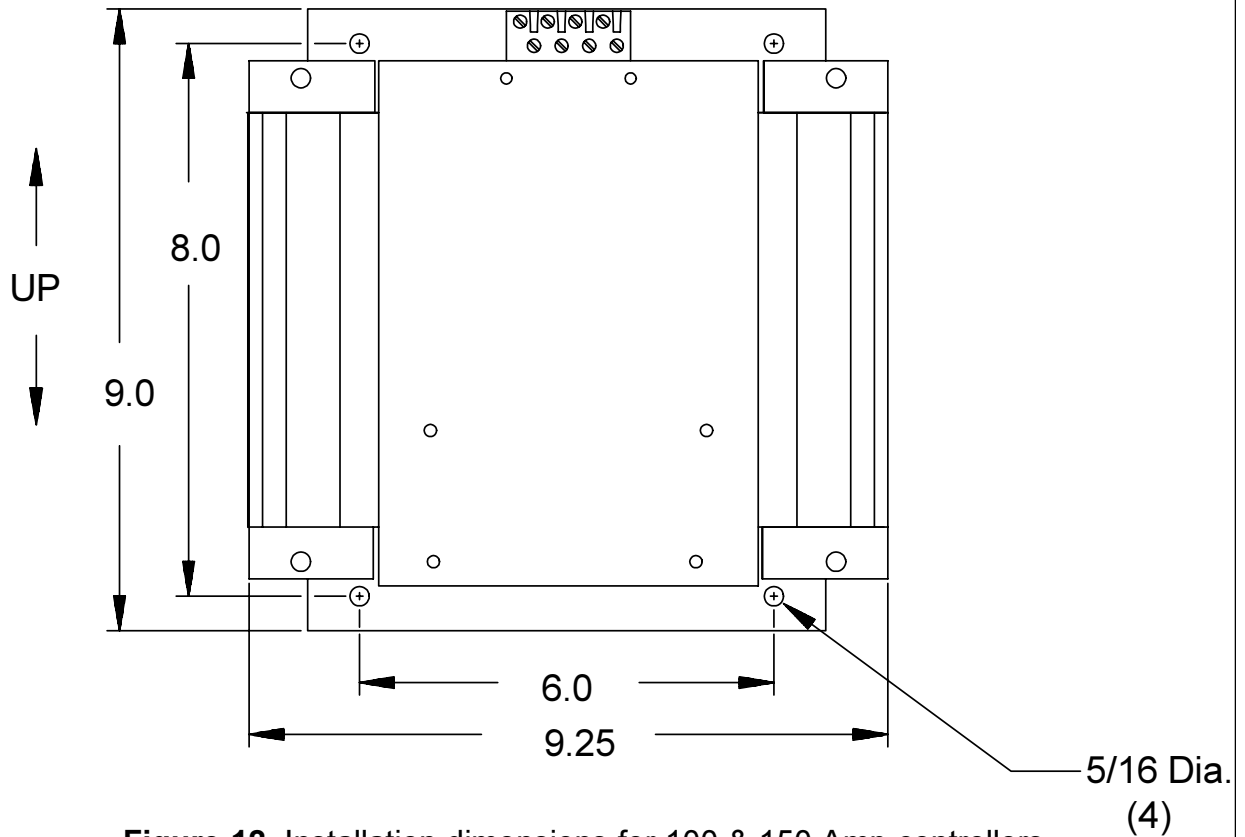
Installation dimensions for 100 & 150 Amp controllers.
